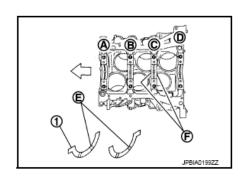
Locating Thrust Bearings Courtesy of NISSAN NORTH AMERICA, INC.
